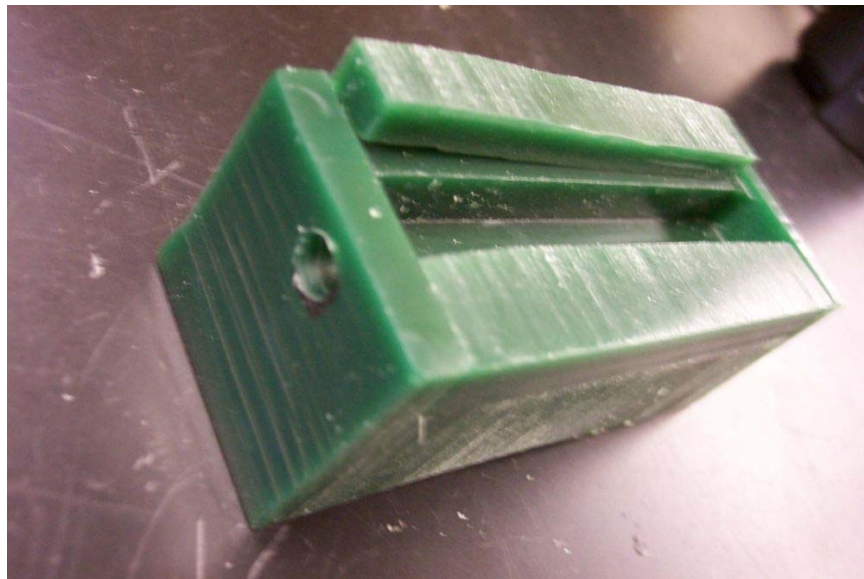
1<sup>st</sup> mold for lens-shear actuator.
